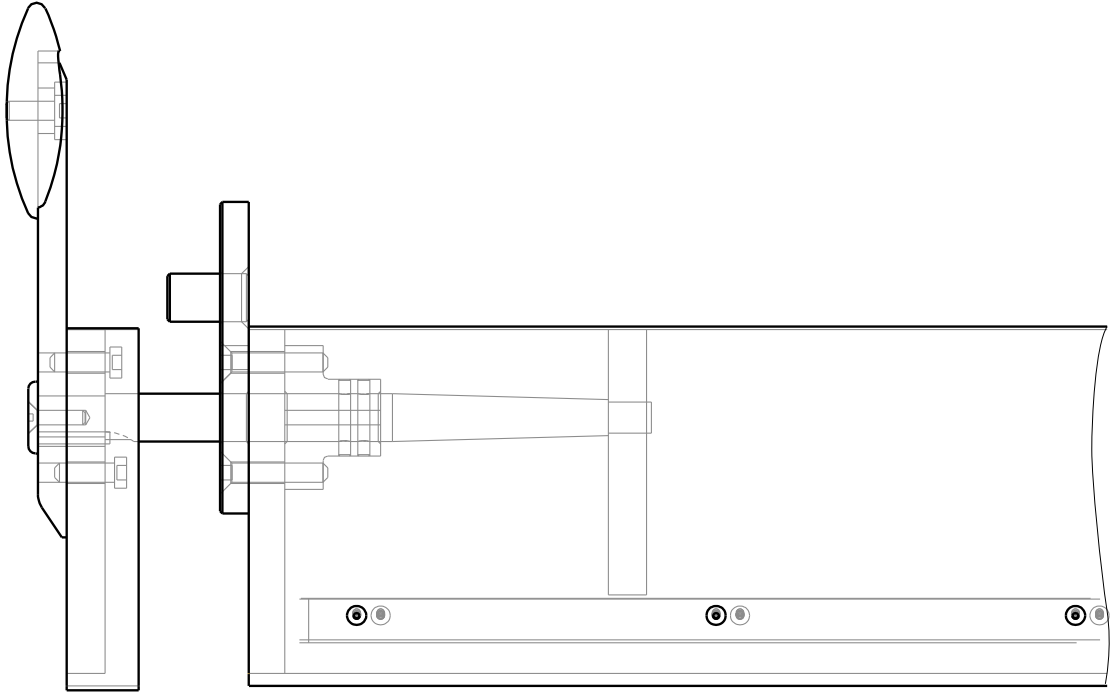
Detail of blade design concept showing cantilevered counterweight
